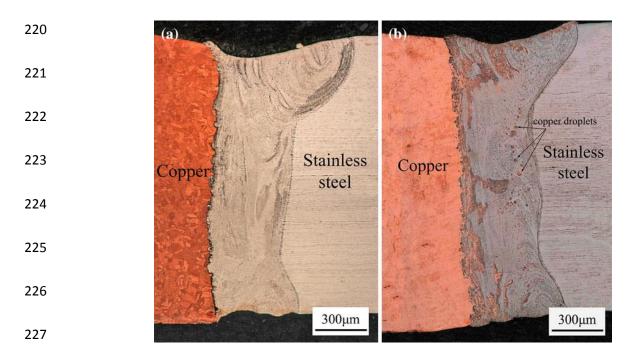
(a) welding-brazing mode (beam inclination 0.2 mm towards steel), (b) fusion welding
